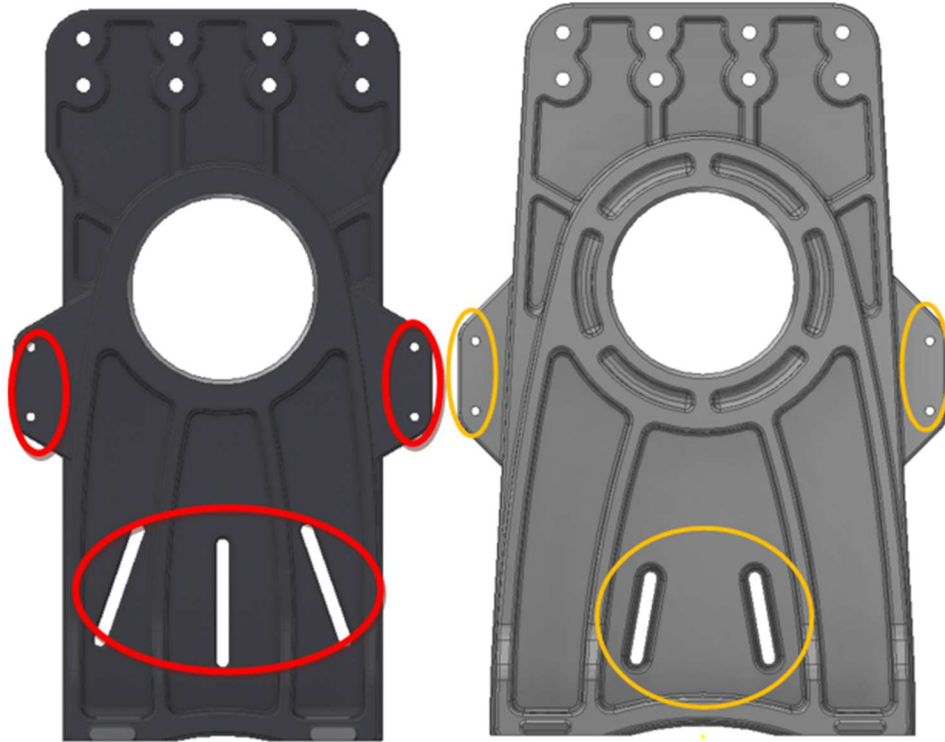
Outboard Stand Mounting Locations GT11 (left) and GT31 (right)
